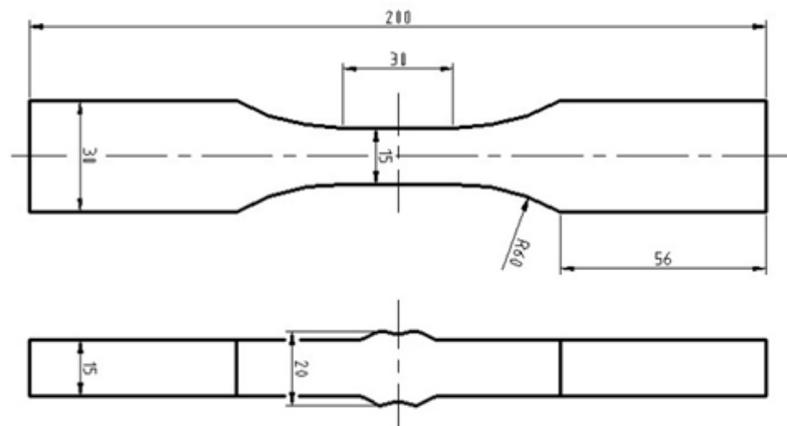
Shape and geometry of the HCF test specimens for butt welded joints (BWJ).
